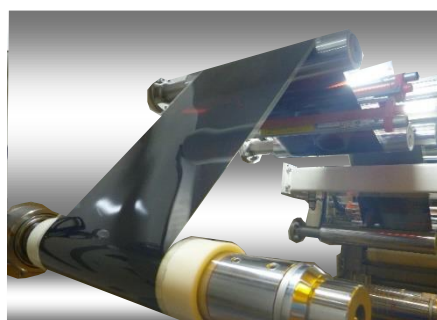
Roll-to-Roll Coating Machine (30cm width)
